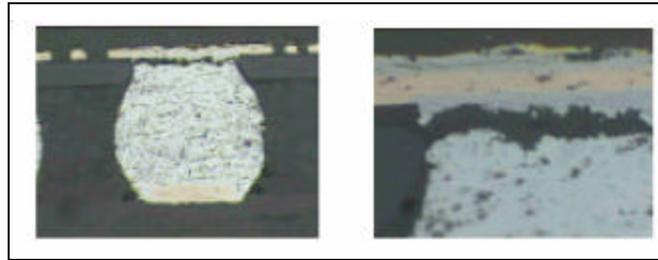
Typical failed SnAgCu Solder Joint Cross-Section
